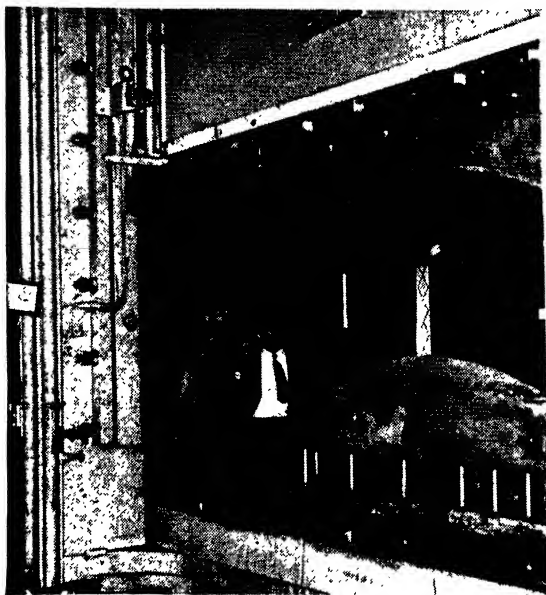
Hydraulic press for stamping parts. (Lockheed Aircraft Corporation.)
